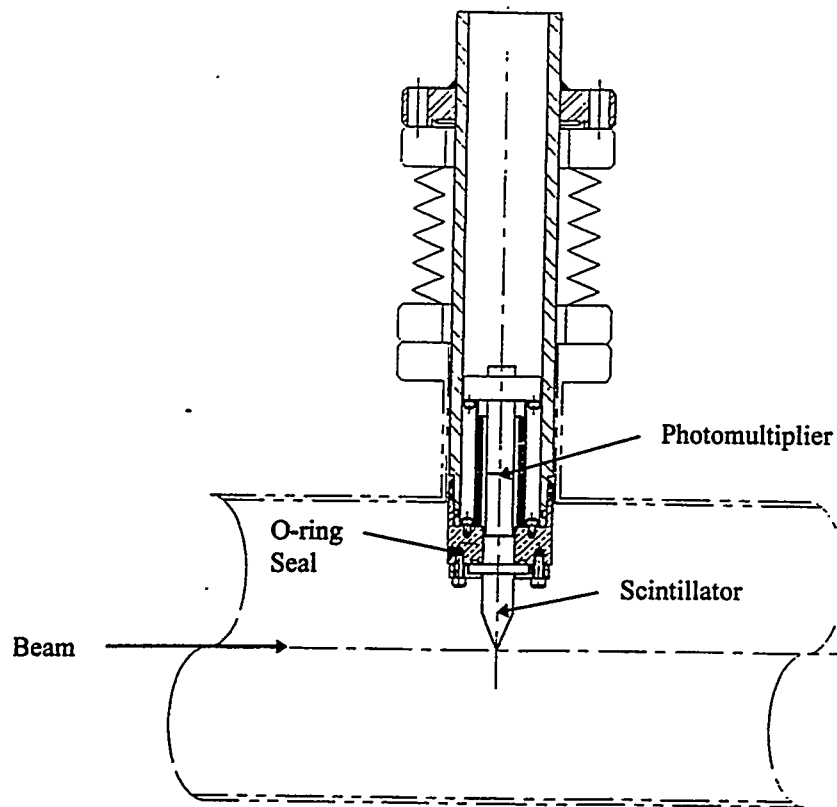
Drawing of the scintillator on the bellows feed-through
